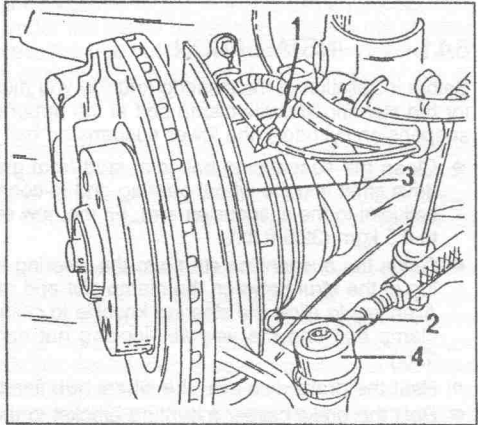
View of the fitted steering knuckle (with ABS).
